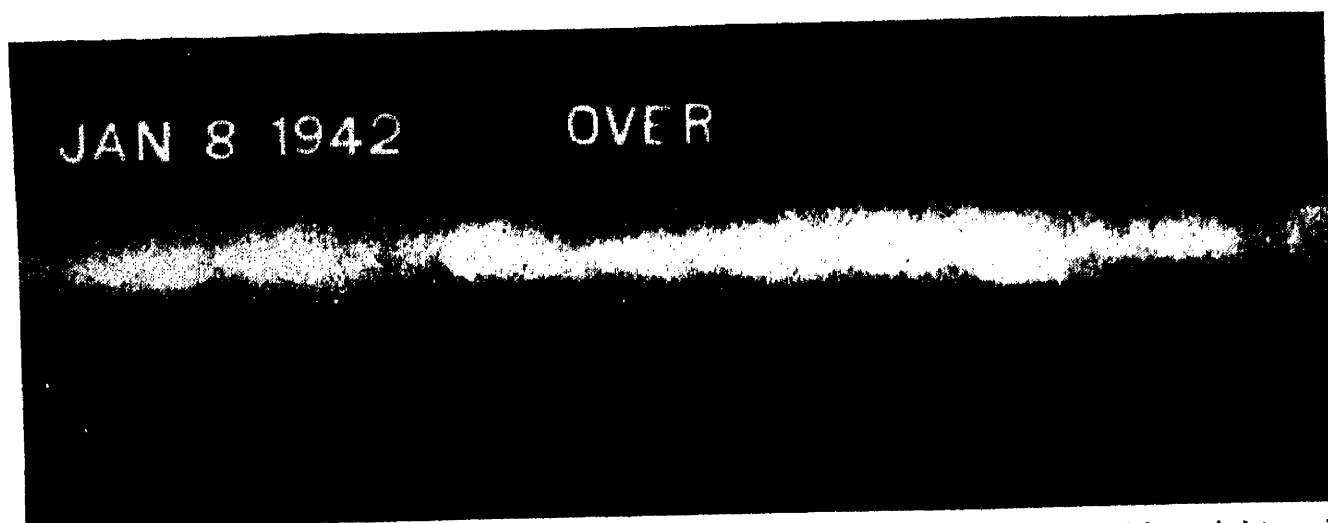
A good weld. Note dark fine lines along upper edge of weld at right end. These are caused by static electrical discharges generated when film is handled on days of very low humidity. They should not be mistaken for cracks in the weld.
